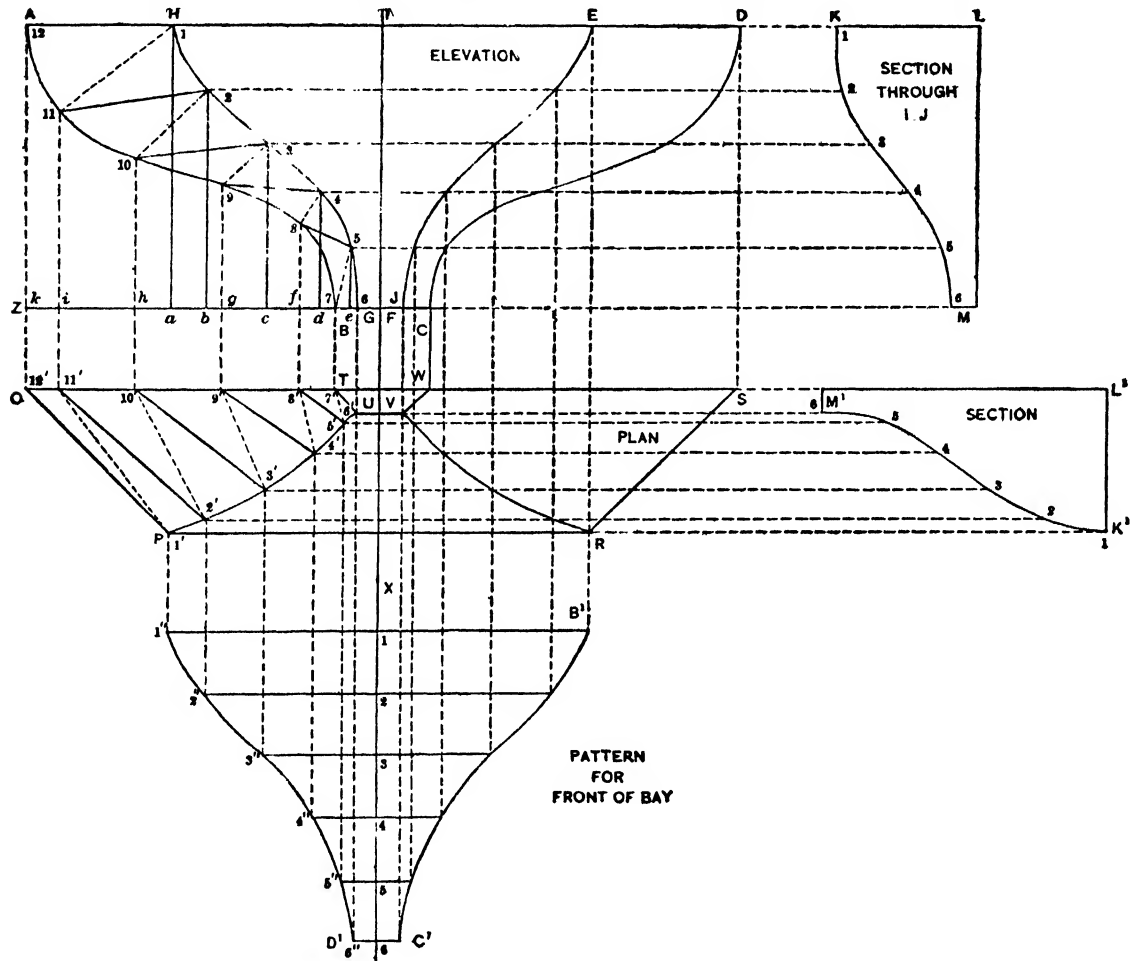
Detail of Bottom of Bay, True Sections and Pattern
